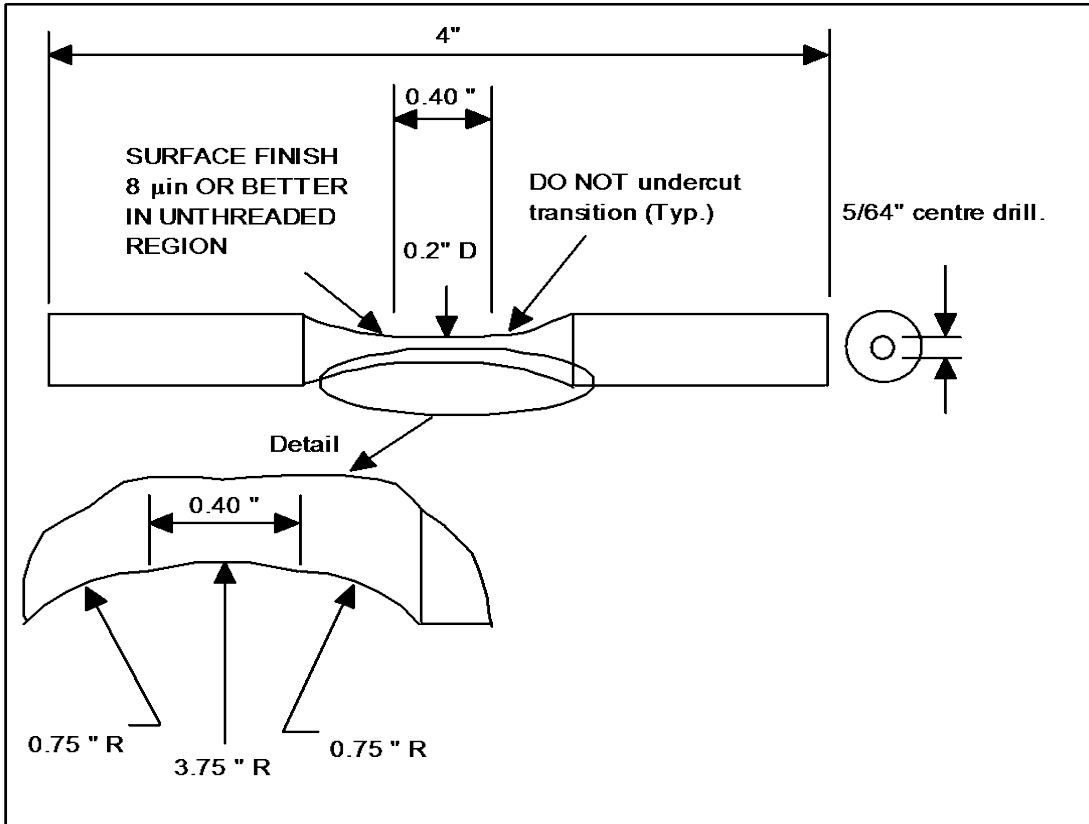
Uni-axial smooth cylindrical fatigue specimen
